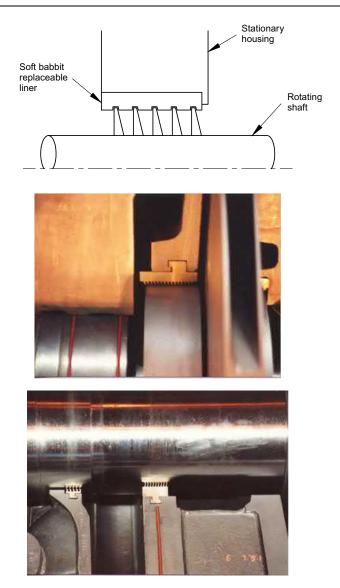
Top*: Schematic of a labyrinth seal; *Middle*: Labyrinth seal used as an eye seal; *Bottom*: Labyrinth seal used as a shaft seal.
